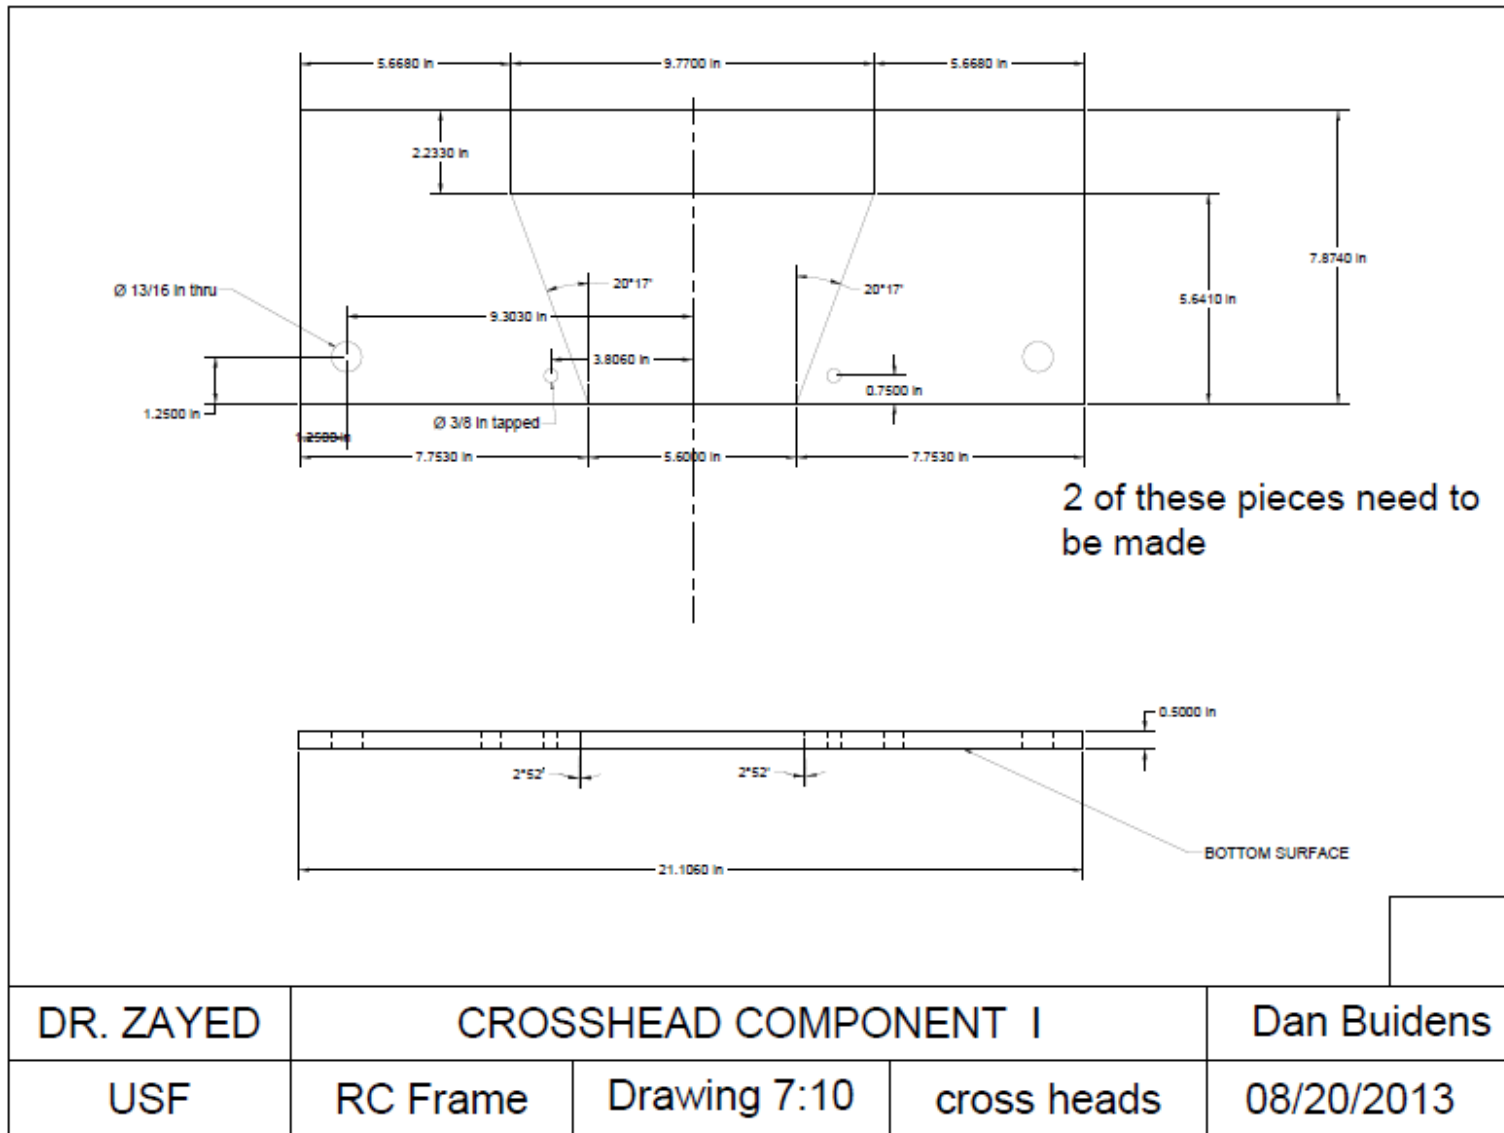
Shop drawings for cracking frame parts 7:9
